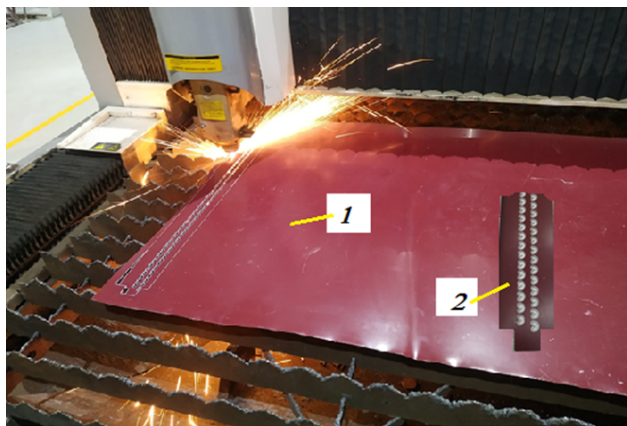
BODOR A3 laser cutting machine 1 – Softened steel sheet of grade 65G; 2 – Tooth-cut segment.
